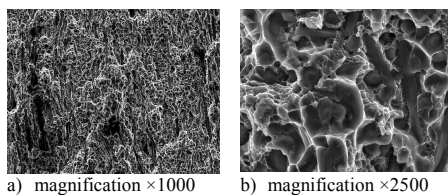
Microscope images of fatigue fracture surface of the 44200+20% Saffil fibres composite.
